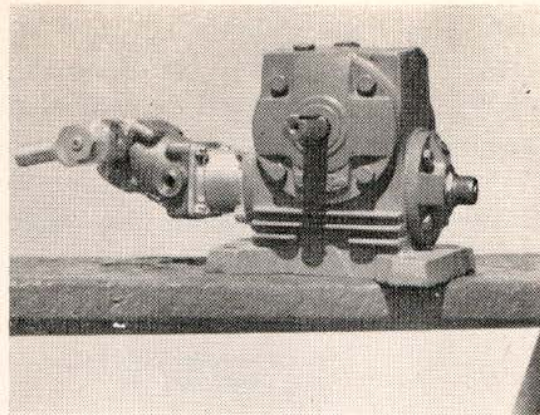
Hydraulic motor on Boston gear reductor for driving vaned rotor feed mechanism.
